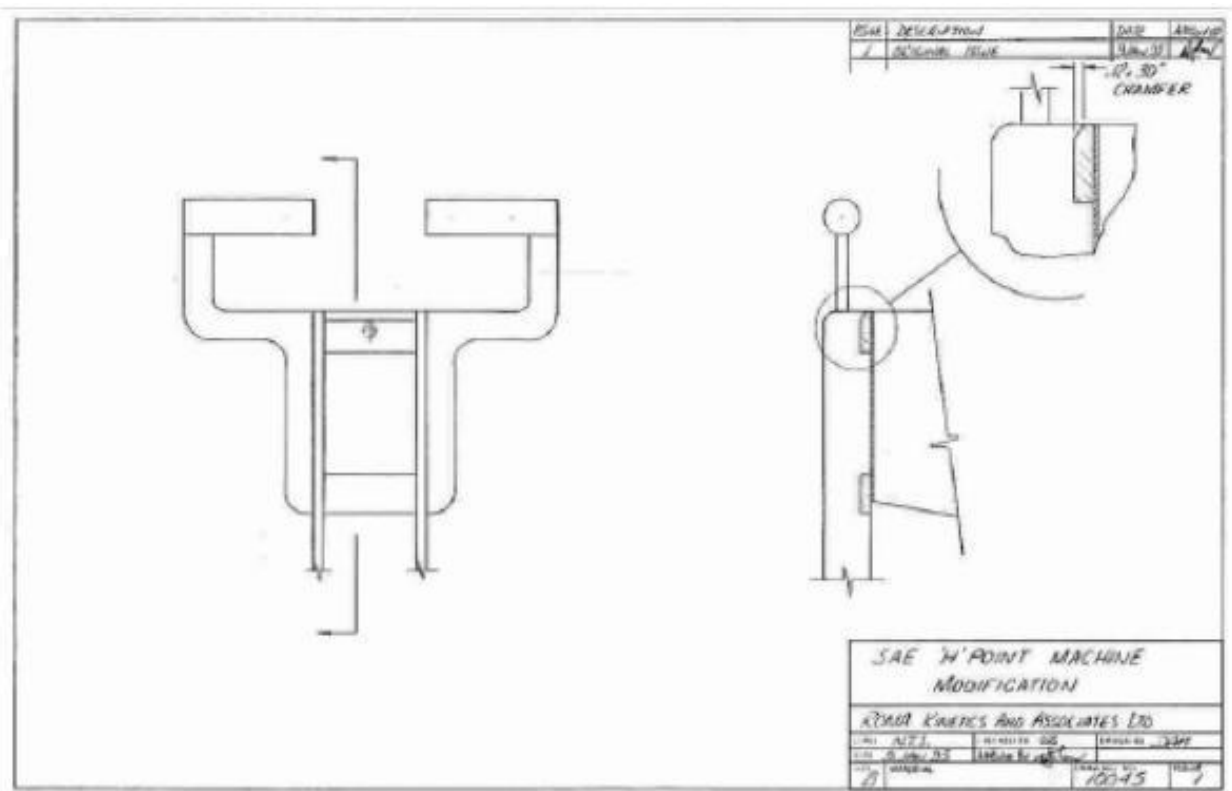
RONA Kinetics and Associates Ltd. Drawing No. 10045 detailing the required modifications to the H-point machine.
